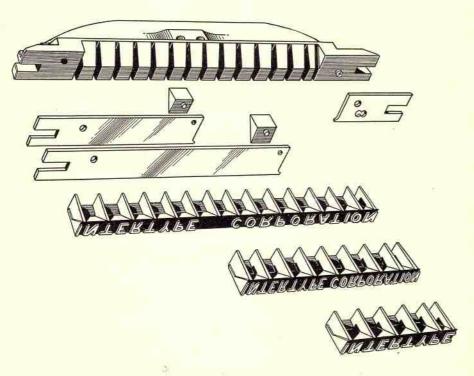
A Newspaper Headletter Triangular Shelf Mold Cap
